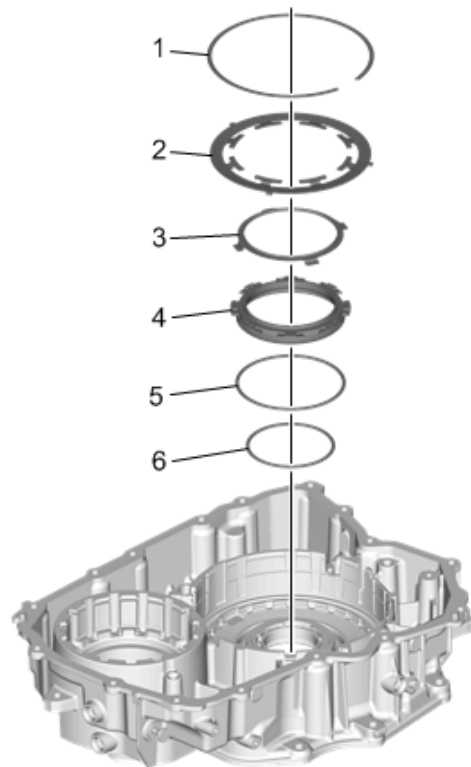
Automatic Transmission Torque Dampener Bypass Clutch Piston
